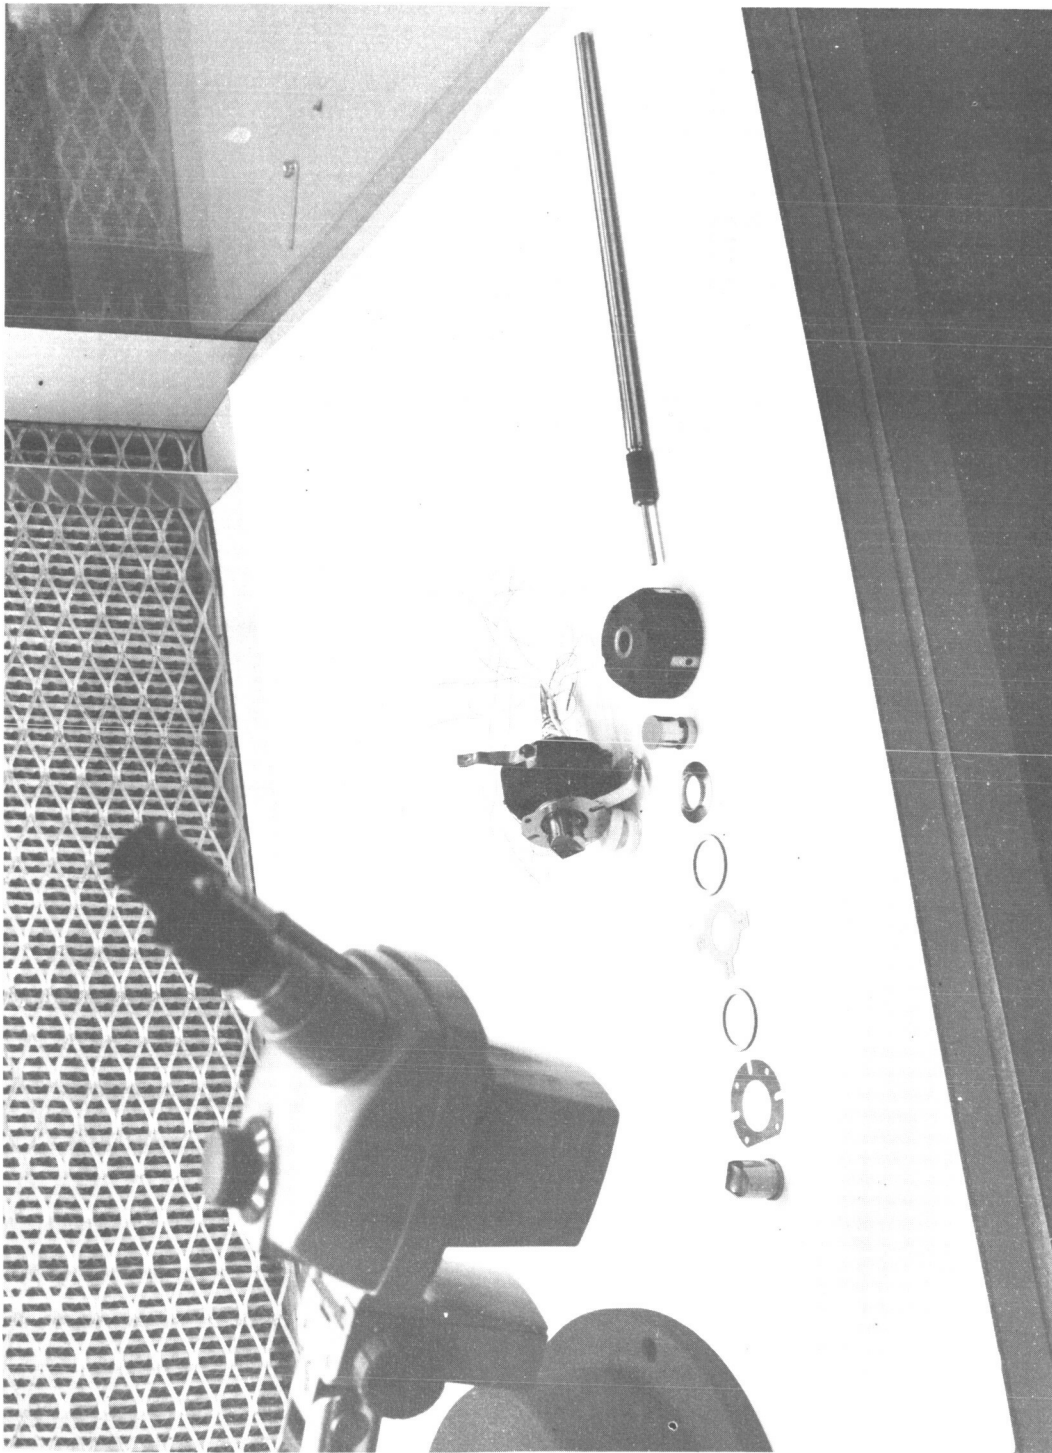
Dust Free Hood, Microscope, Exploded View SET VII
